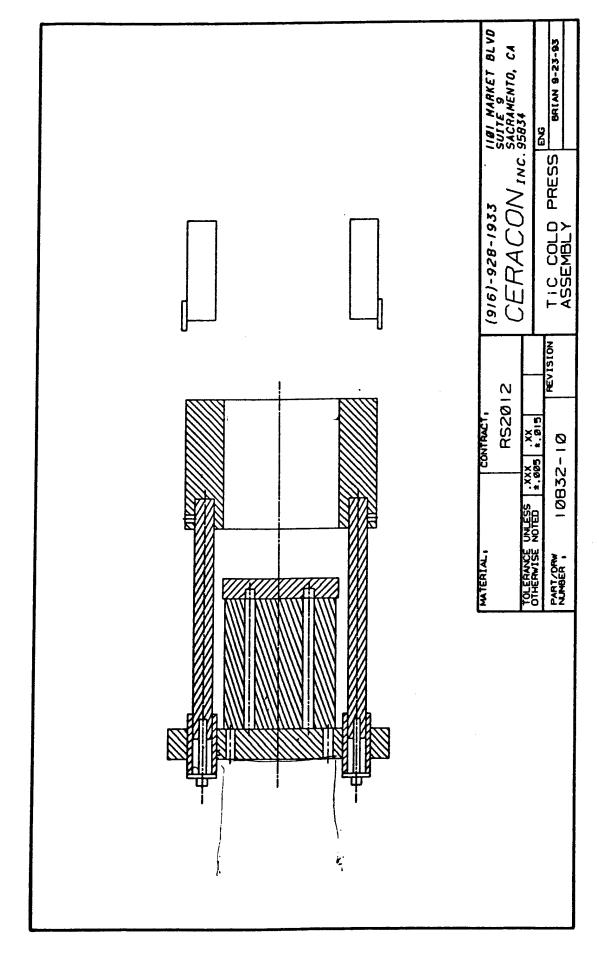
Titanium Carbide (TiC) Cold Press Assembly.
